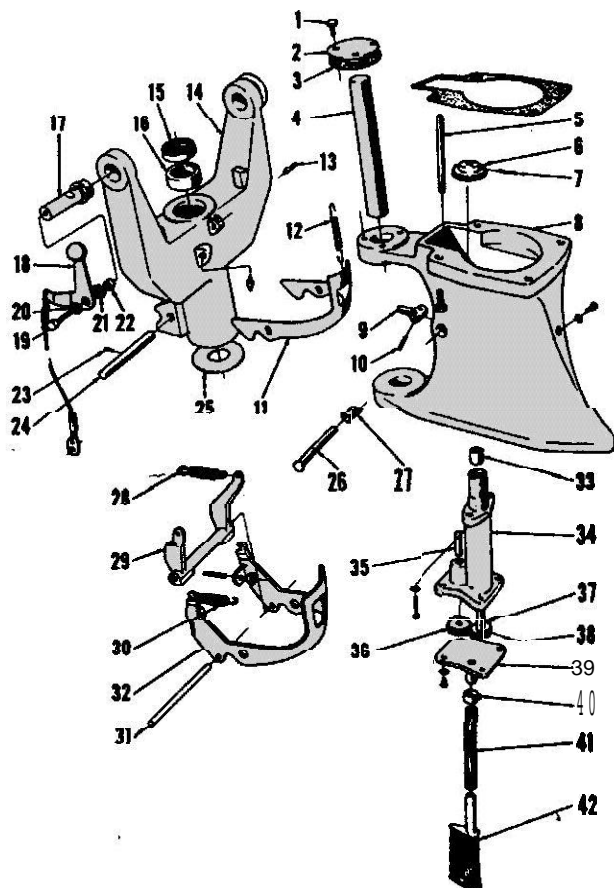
Exploded view of steering yoke and intermediate housing assemblies.
